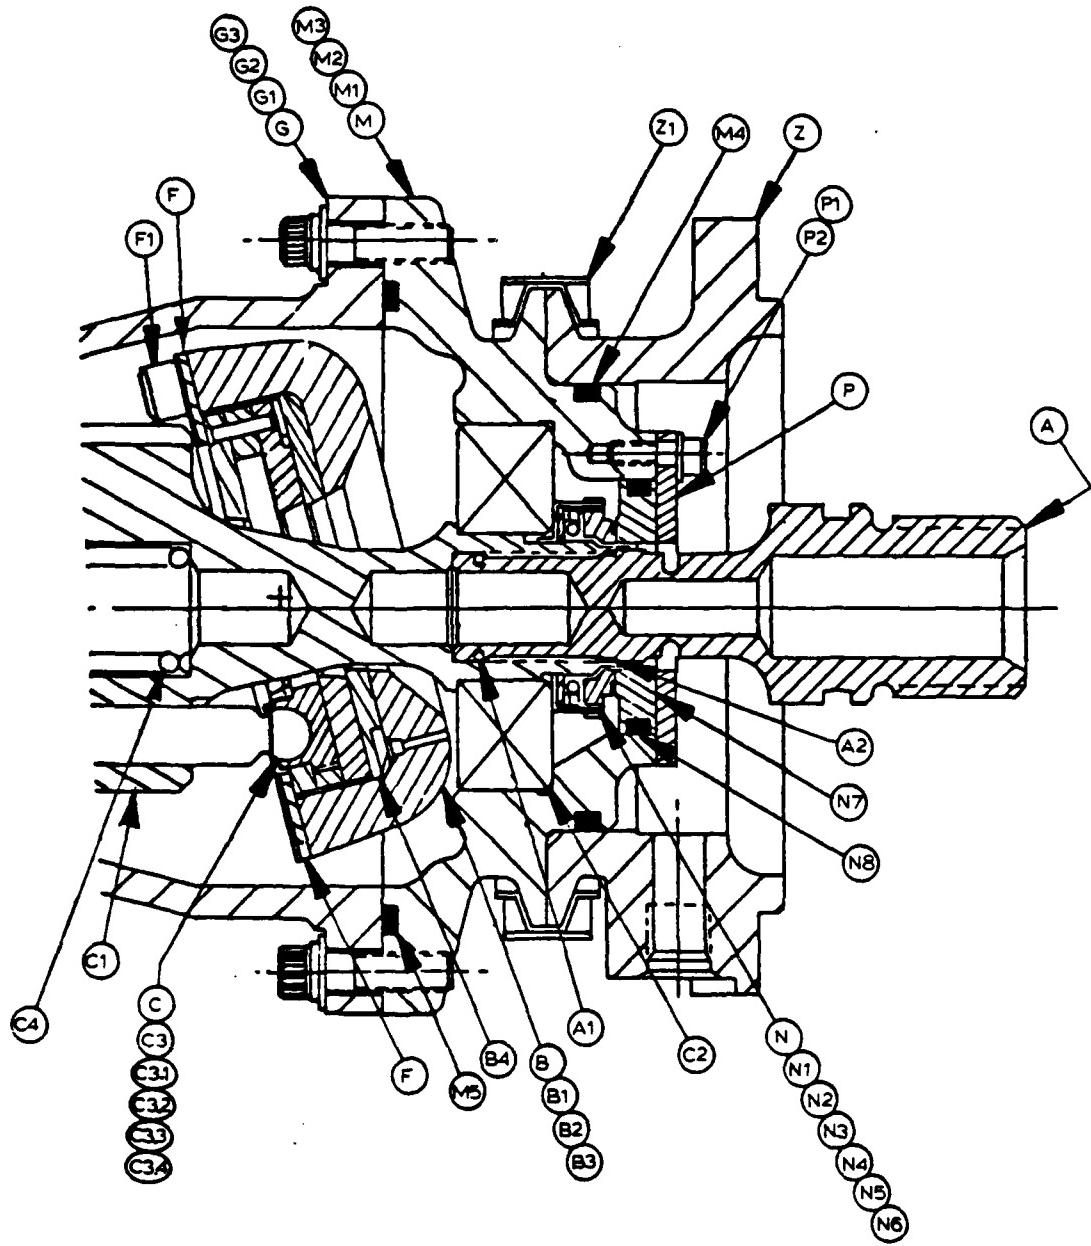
Side View - Drive Shaft End of Pump Showing Coupling Shaft, Shaft Seal, and Yoke and Piston Detail
